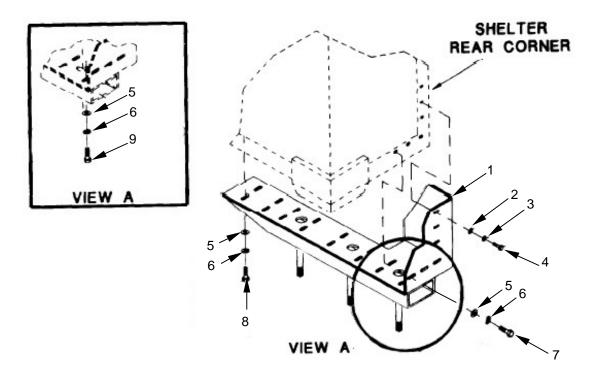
Attach Rear Mounting Bracket (Upper)
